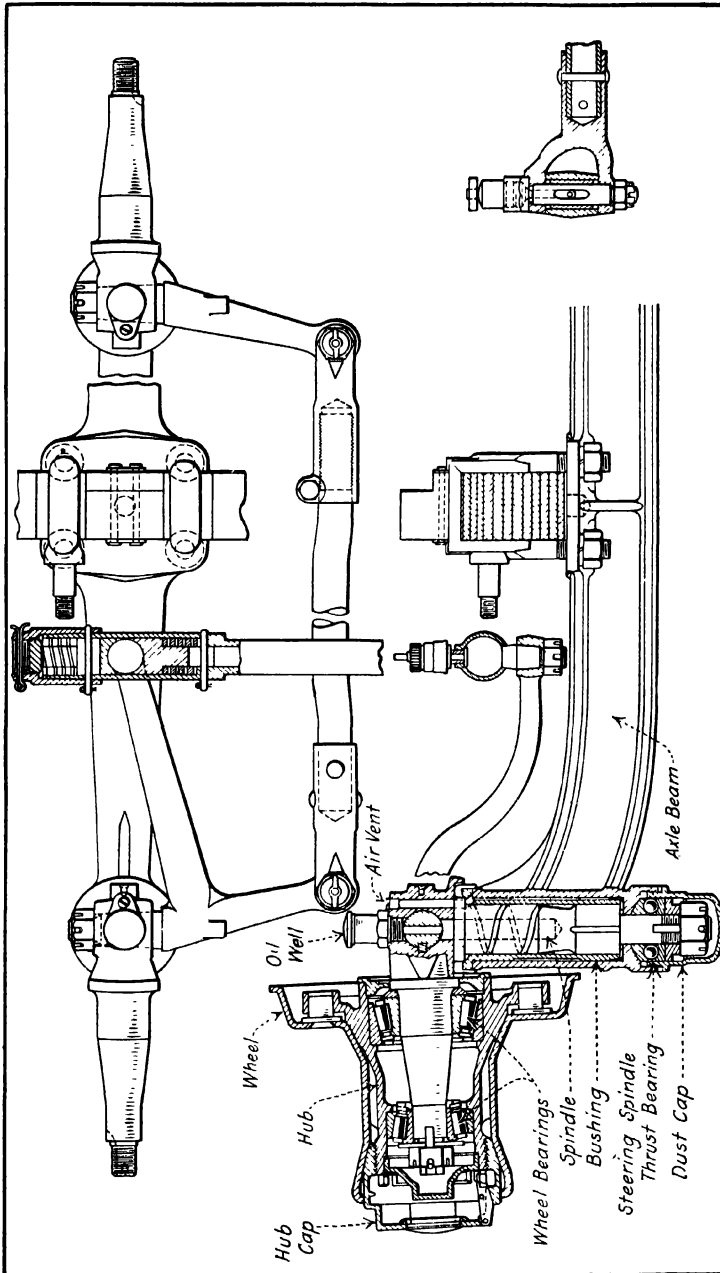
Front Axle Hub and Spindle, Lemoine Type. (Marmon.)
